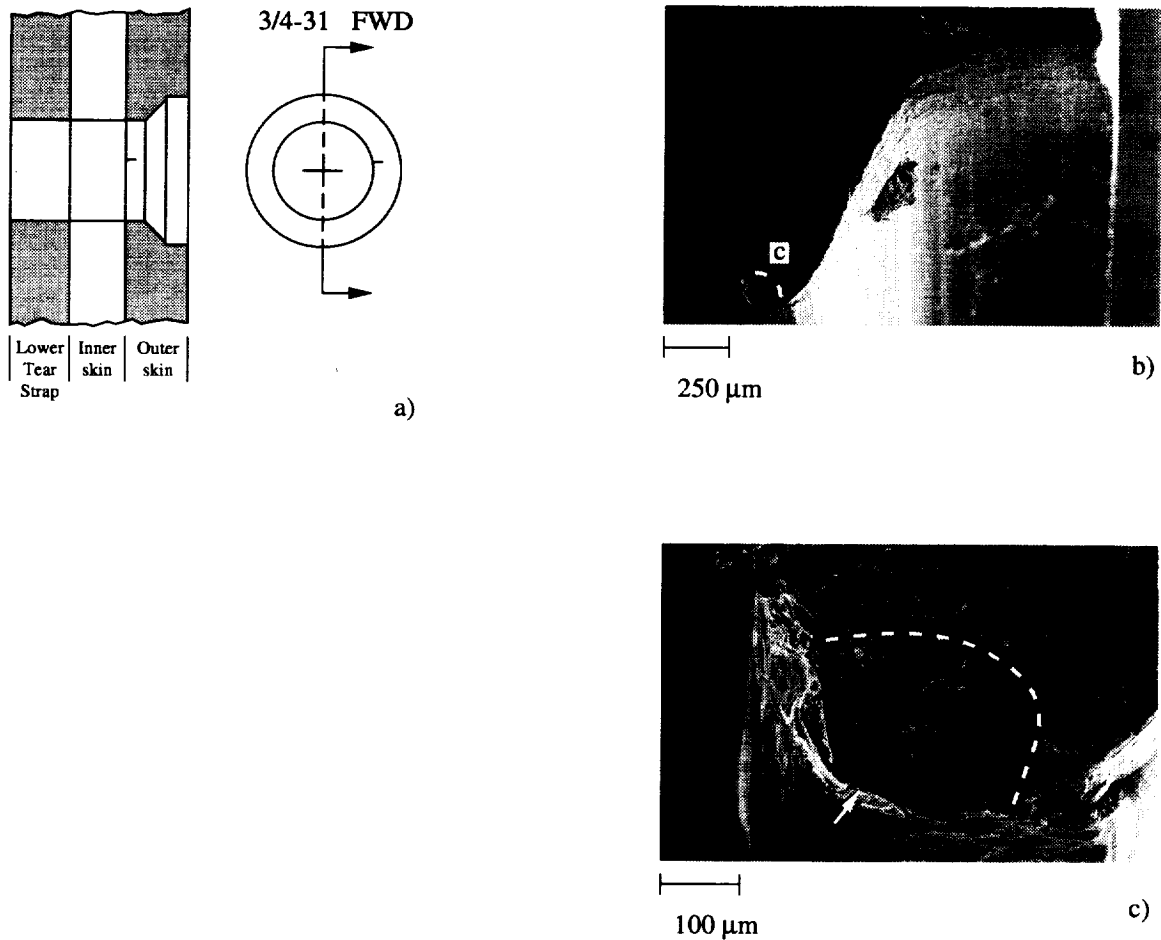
a) The schematic shows the rivet hole 3/4-31 configuration and the location of the outer skin fatigue crack oriented in the forward direction and about the 3 o'clock position. b) The SEM micrograph shows the fracture surface of the fatigue crack located at the shank region of the outer skin rivet hole. The dashed line marks the fatigue crack front. c) The SEM micrograph shows the fatigue crack at region "c" in Figure 10.28.b at higher magnification. The arrow marks the likely site of crack initiation and the dashed line marks the fatigue crack front.
